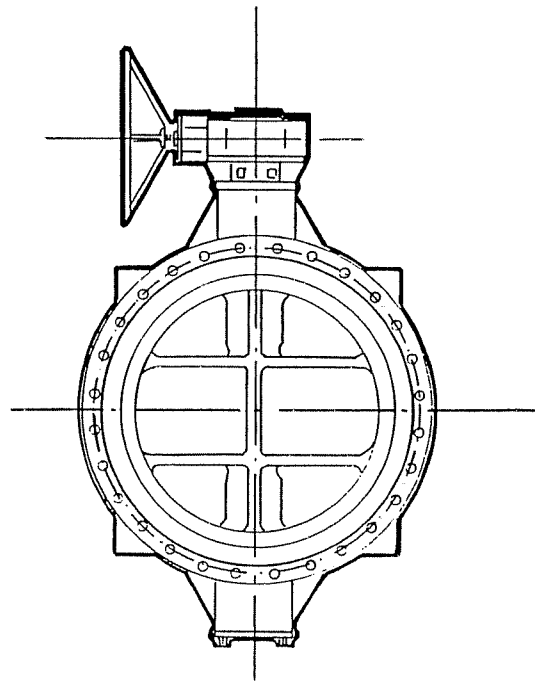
A BUTTERFLY VALVE (FLANGED TYPE)
